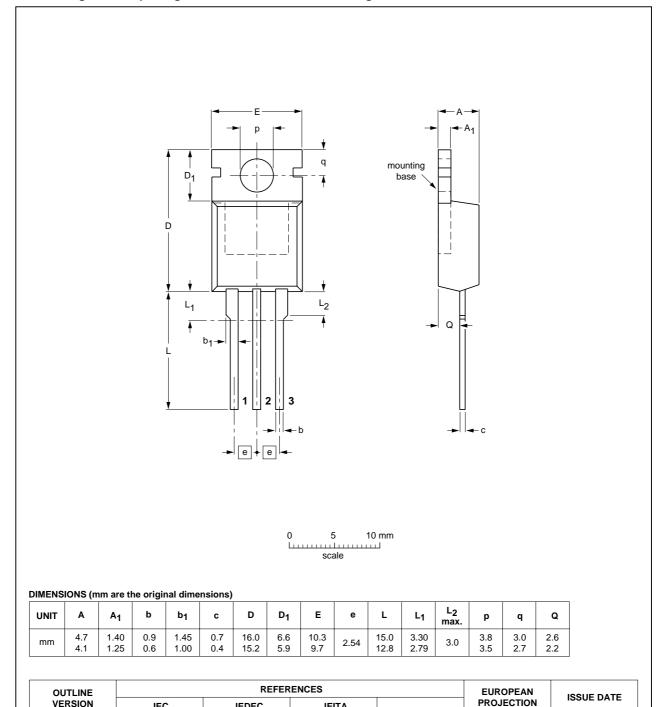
Package outline SOT78 (3-lead TO-220AB)
